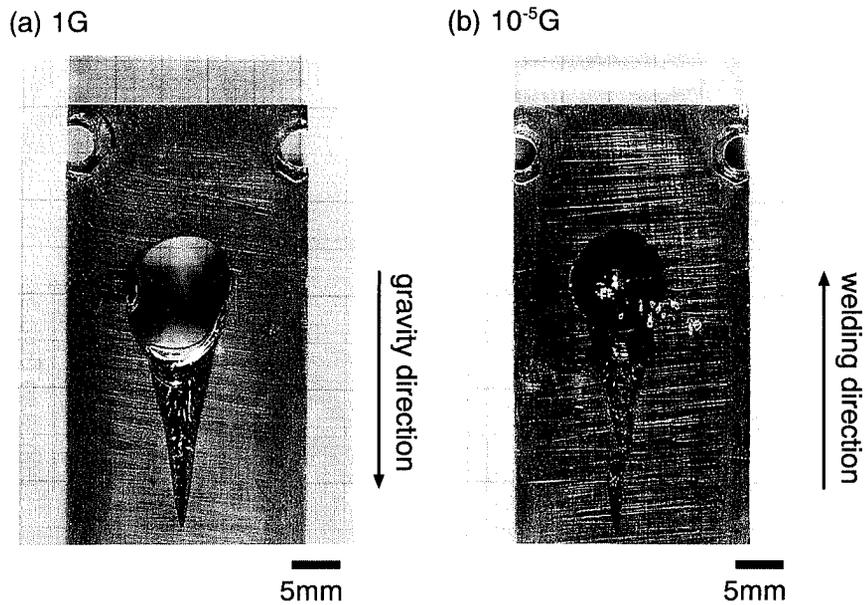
Weld bead appearances of pure silver in vertical up welding with argon shielding gas.
